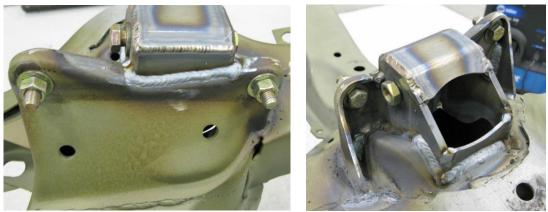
Weld Detroit Speed Pocket to Factory Upper Control Arm Mount
